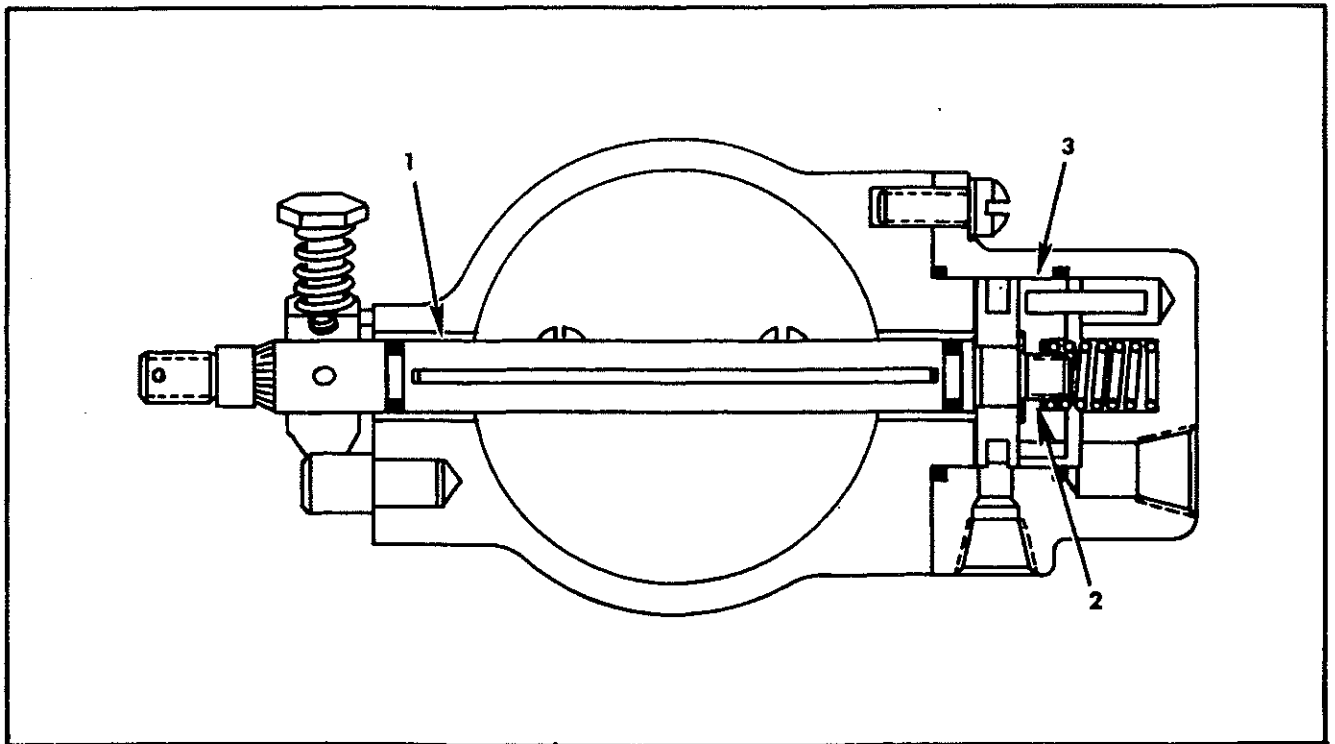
AIR THROTTLE ASSEMBLY
